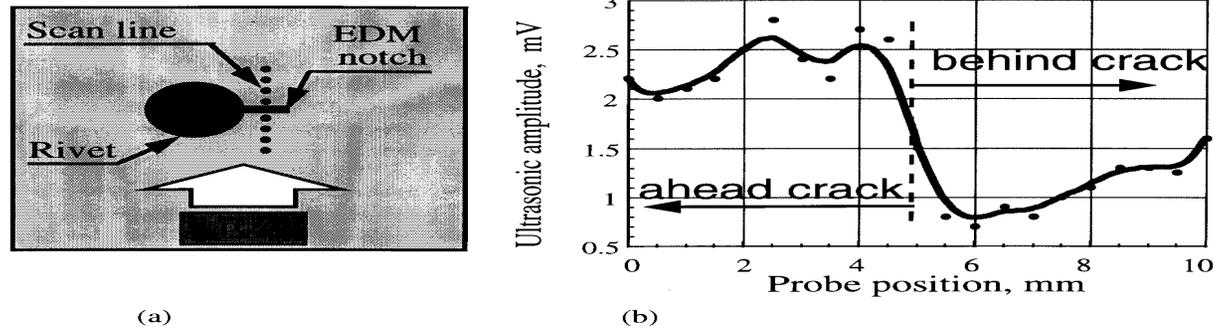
(a) - rivet / crack specimen, (b) - line scan over the crack.
